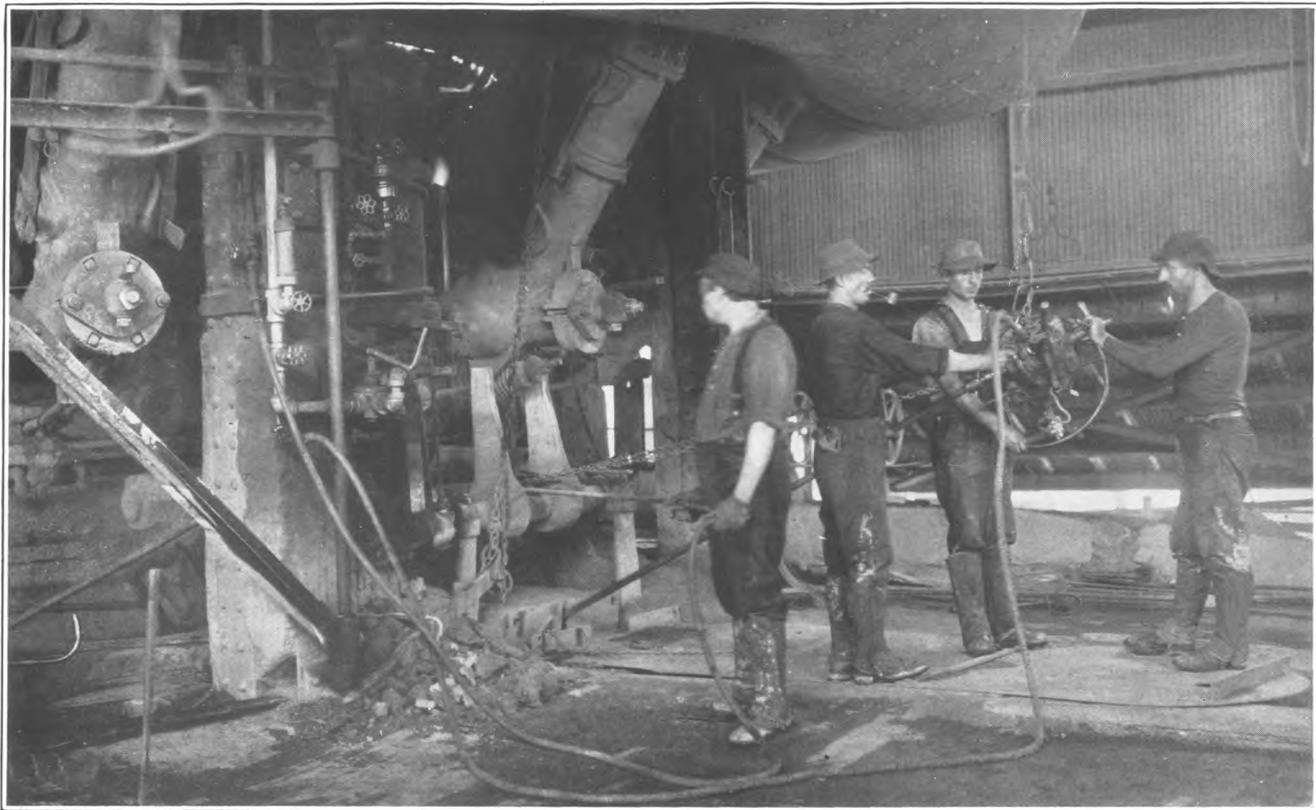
IMPROVED METHOD OF DRILLING A TAPPING HOLE.
